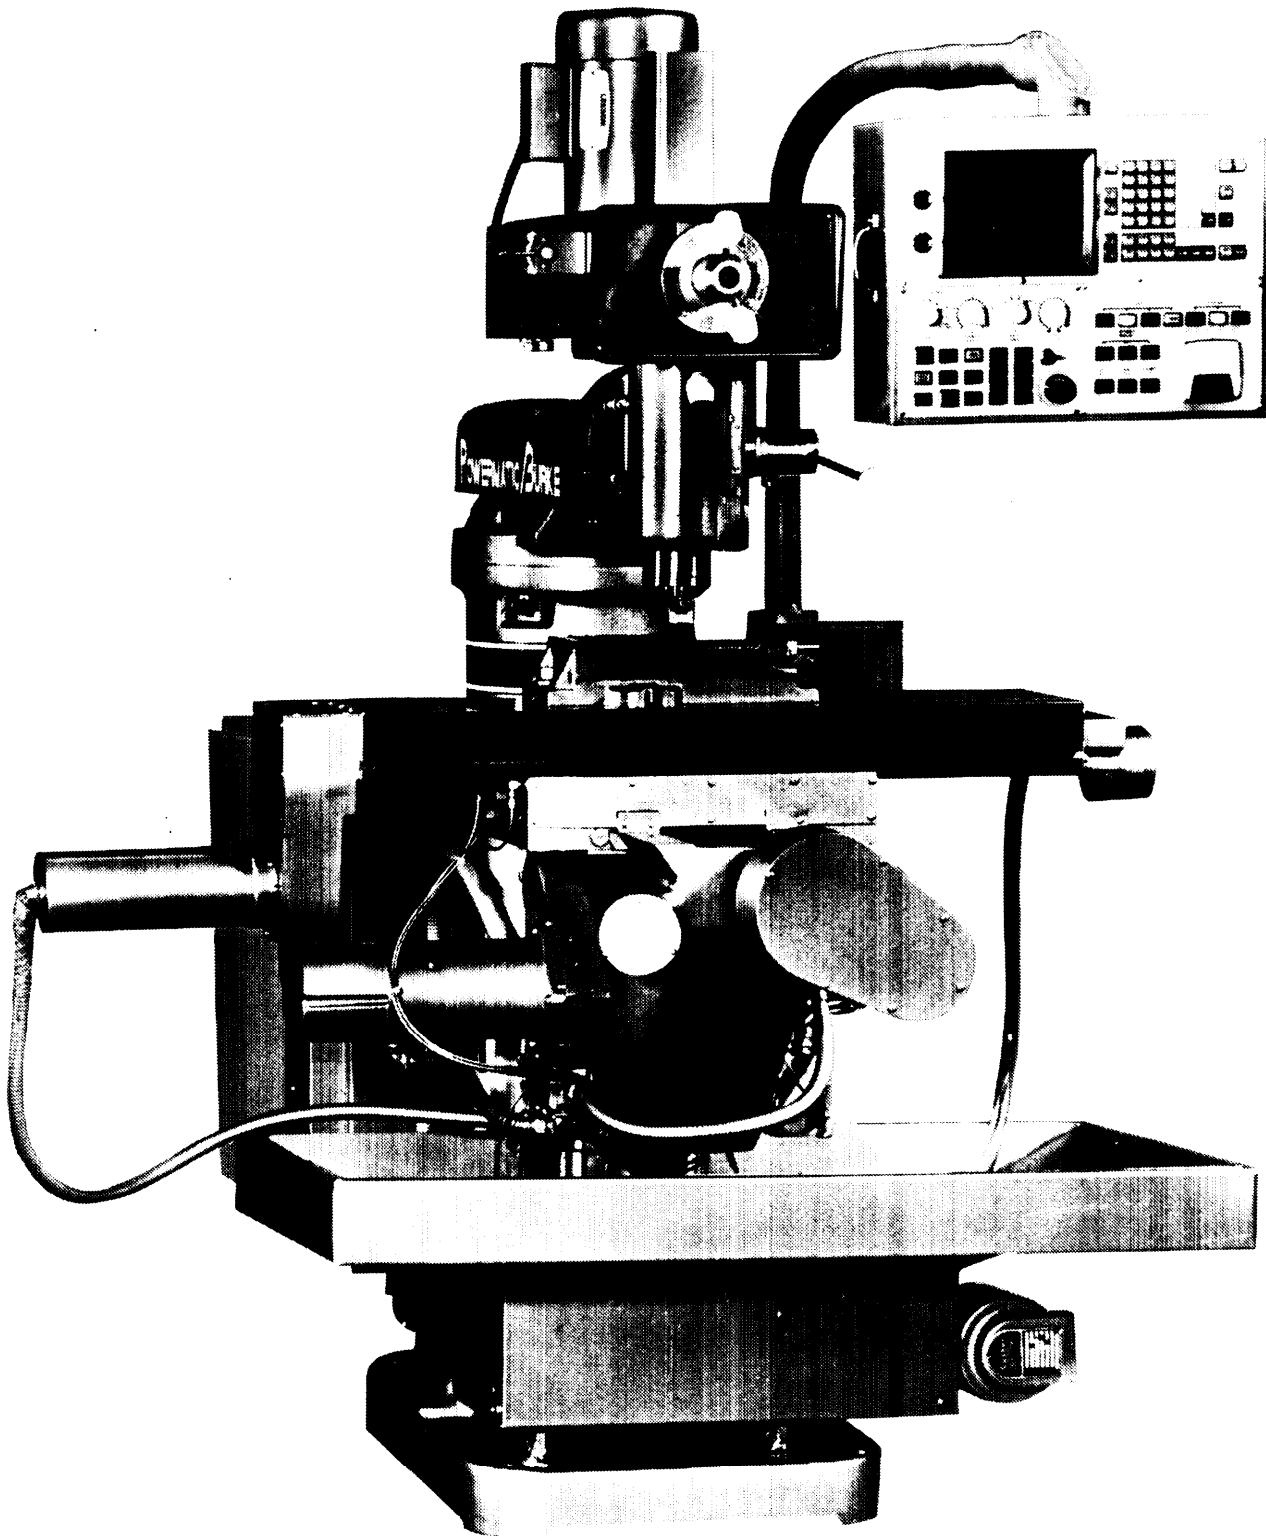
Three-axis, knee-type, vertical spindle milling machine (Burke Division Powermatic Houdaille).
